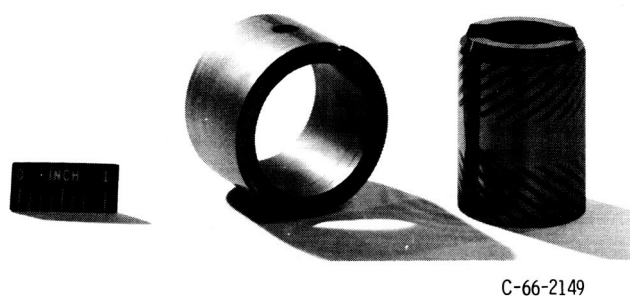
Plain bearing MP-3 against herringbone-groove journal K-14 after test. C-66-2149
